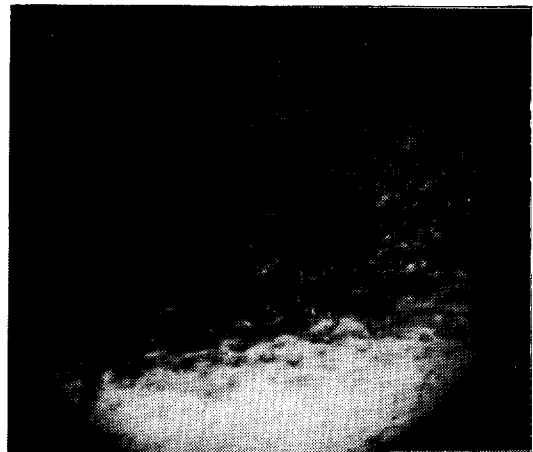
Photomicrographic view during lathe cutting operation (Cemented carbide tool tip and cutting material SCM4)
